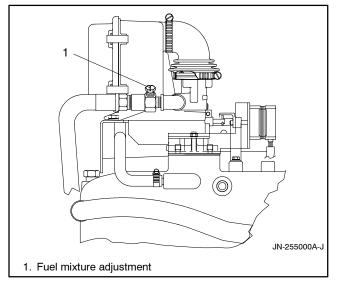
Fuel Mixture Adjustment, 10/12 kW Shown
